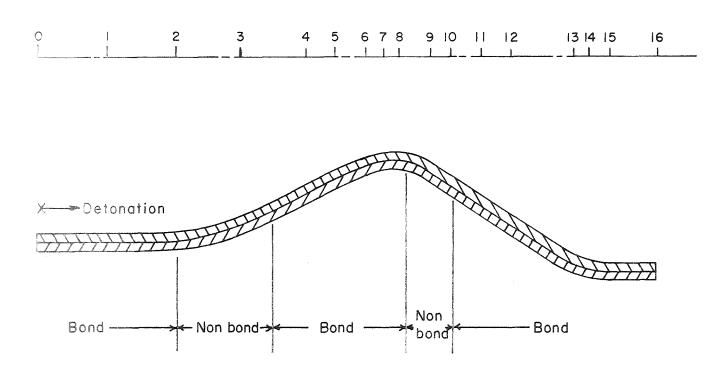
SCHEMATIC SHOWING BONDED AND NONBOND AREAS IN FIRST STAINLESS STEEL MOCK-UP-TO-SHELL WELDING EXPERIMENT
